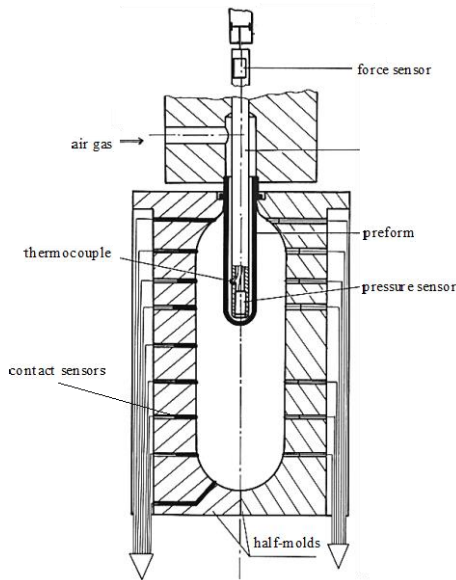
Description of the instrumented mold of a stretch/blow molding machine
